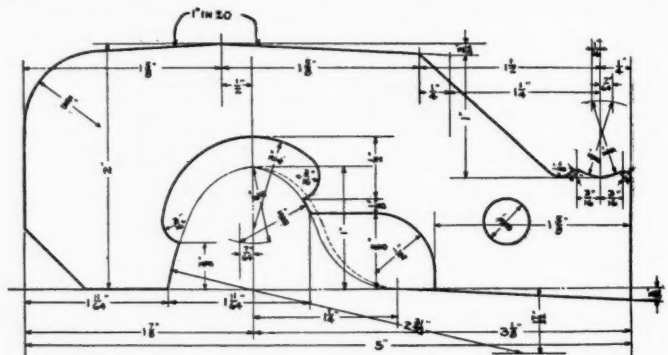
Minimum Flange Gage for Solid Steel Wheels.
